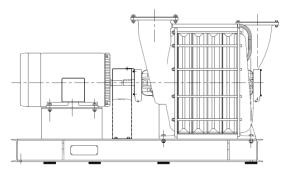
Mounting dampers (black) under the machine – side view (reference only)
